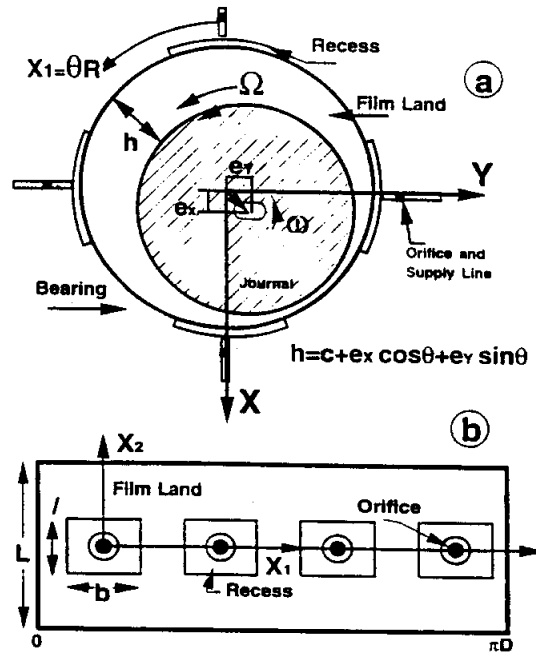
Geometry of a hydrostatic journal bearing: (a) Axial view and coordinate system. (b) Unwrapped bearing surface.
